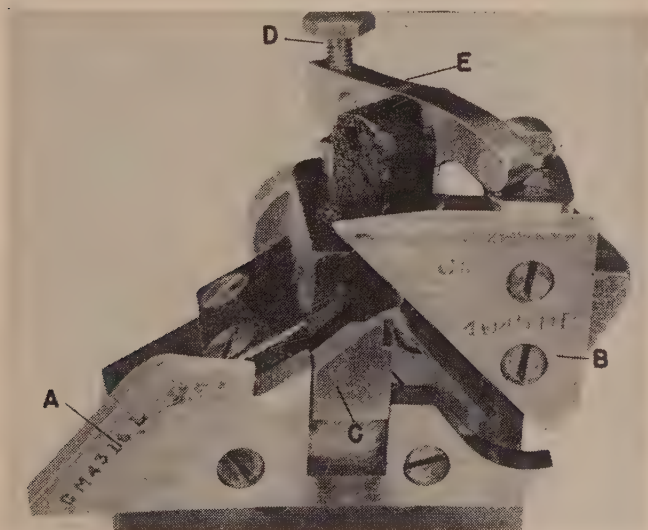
Inside view of cam ring section from a 24-inch, 32-feed S.S.W. Brinton machine.
